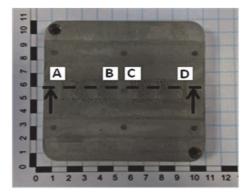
A precious geometry platform with reducing plates and welded joints (the letters show the sections AB and CD reducing plates used for microstructural analysis)
